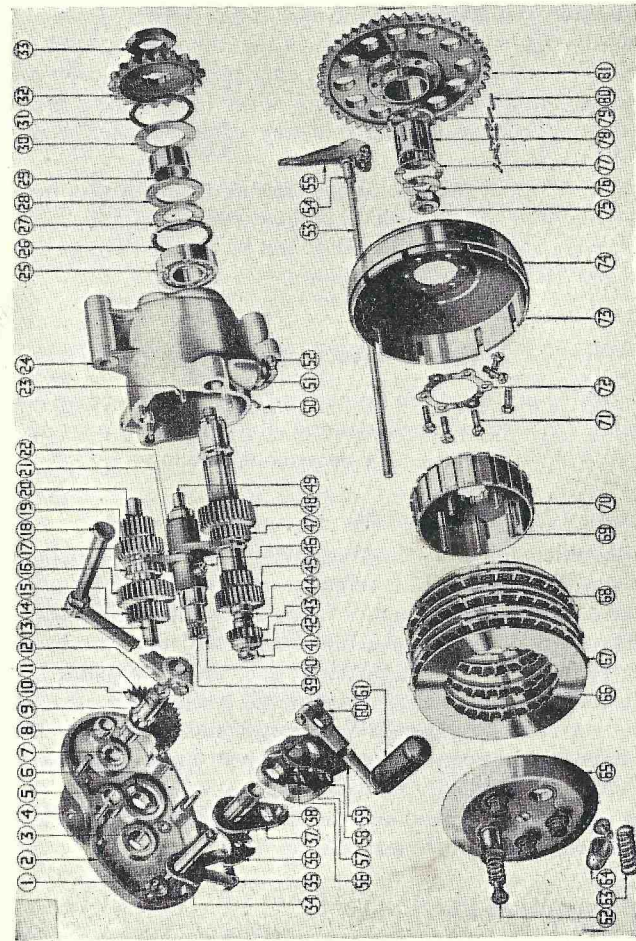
EXPLODED VIEW OF GEARBOX ASSEMBLY—BURMAN MODELS CP AND BA.
